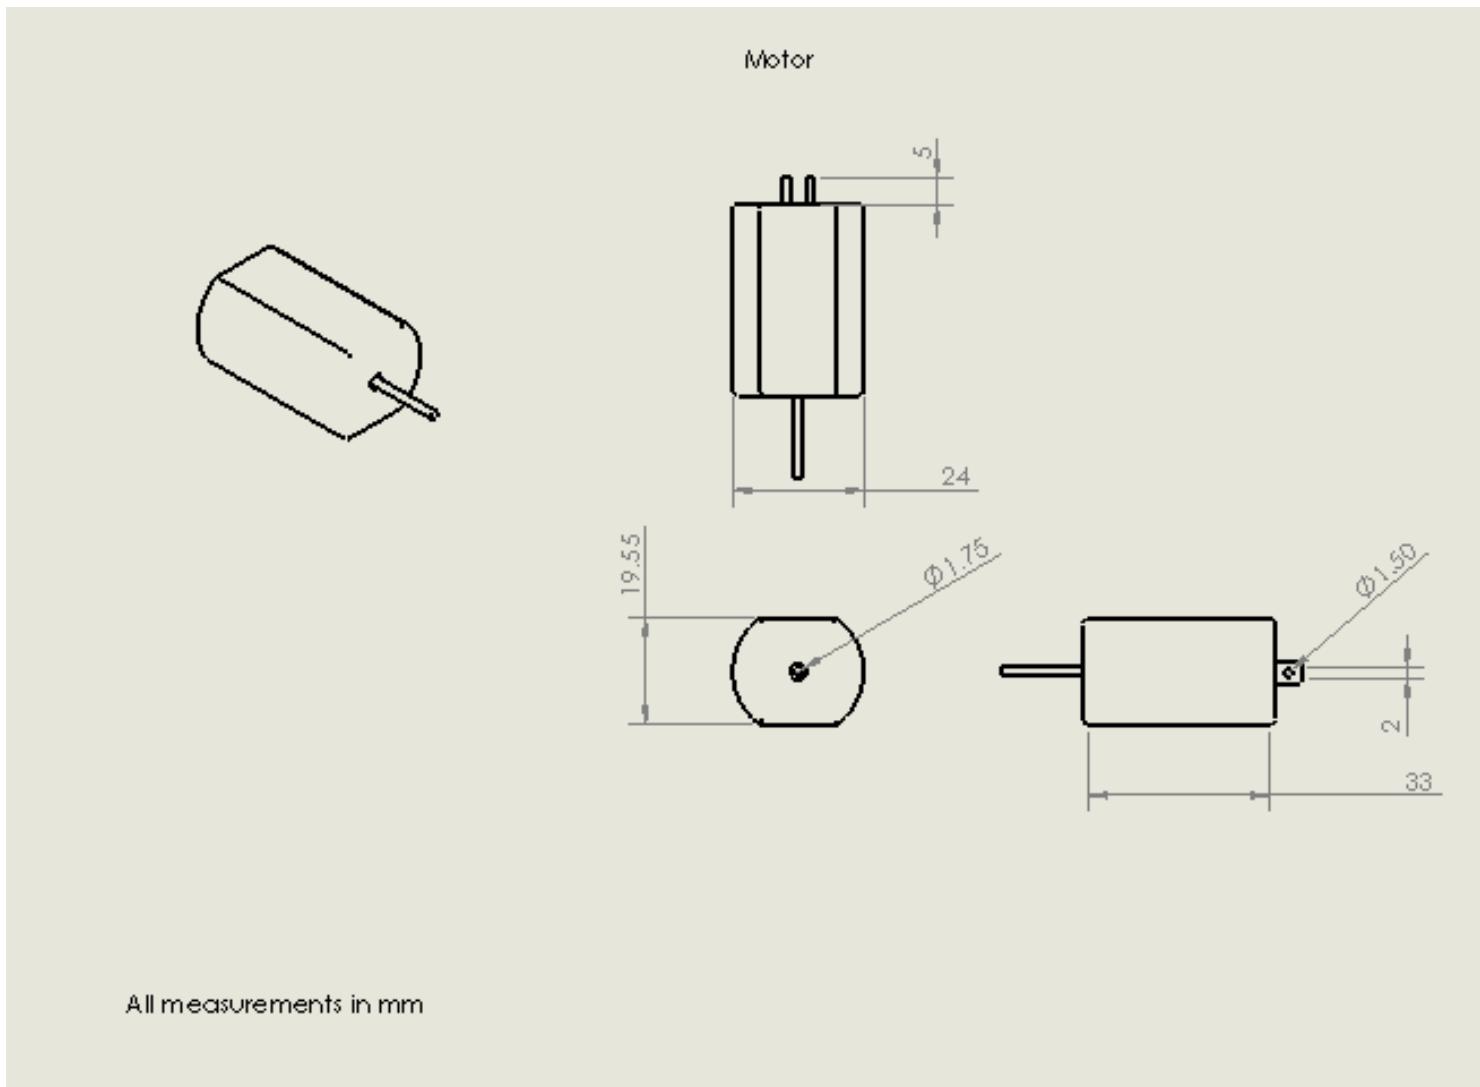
Part 1016 (Standard Motor 12850 rpm 12VDC) Part Drawing
